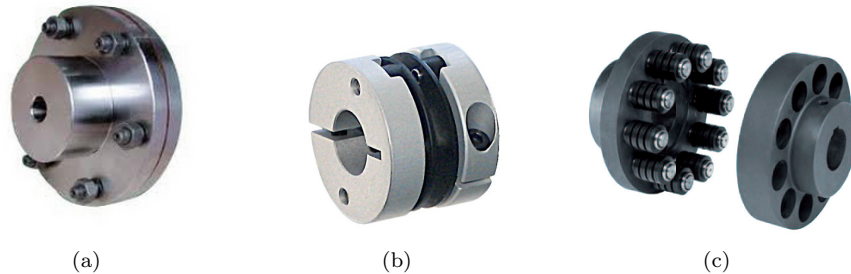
Types of coupling used in rotating machinery (a): rigid coupling (b): diaphragm flexible coupling (c): pin flexible coupling .
